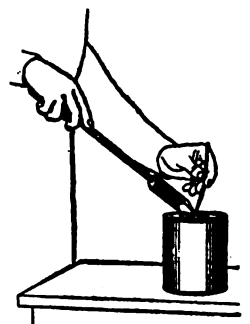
Closing the vent hole in a can of vegetables with solder and soldering iron.
